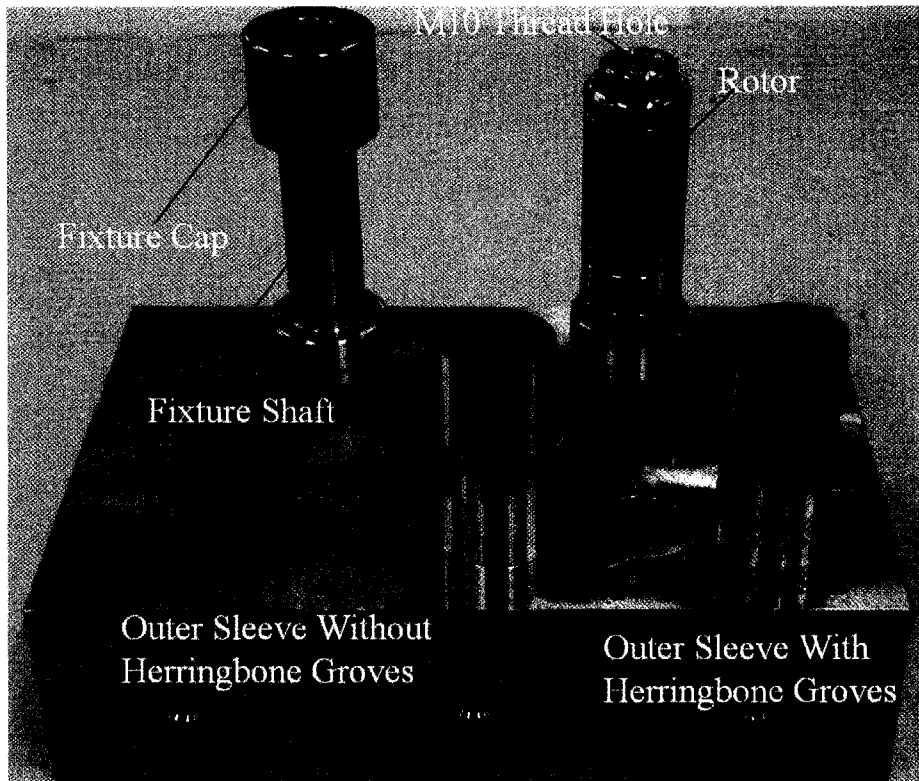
Photograph of the rotor, assembly fixture and the outer sleeve
